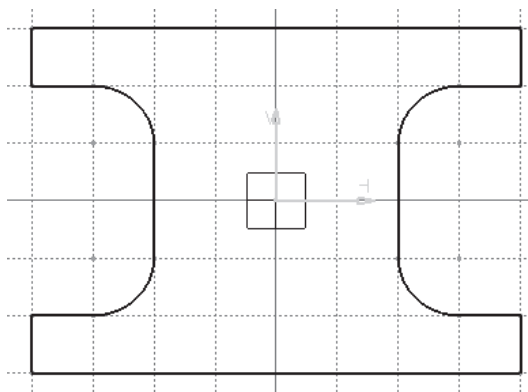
The sketch, after drawing the outer loop of the sketch
